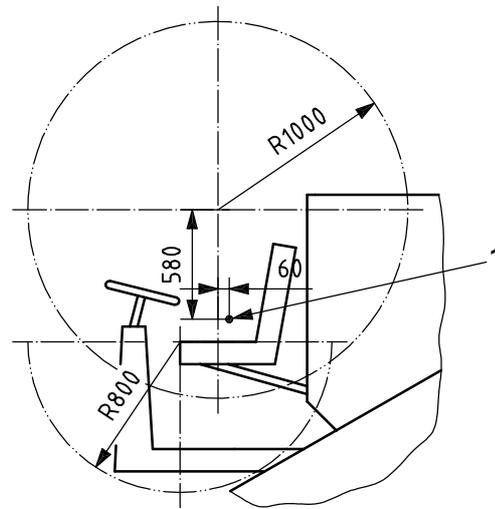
Instructional seat dimensions5.3.4 Shearing and pinching points
